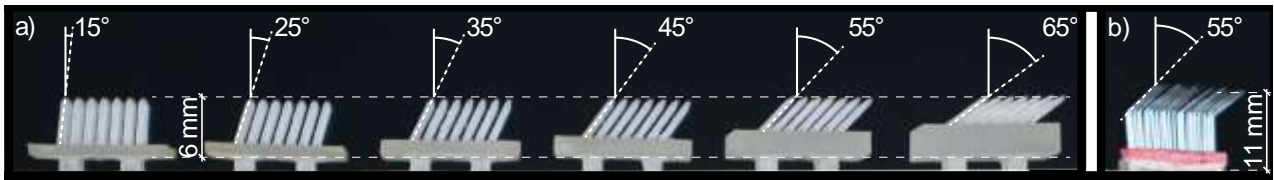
Bristle pads: resin 3D printed (a), stainless steel (b).
